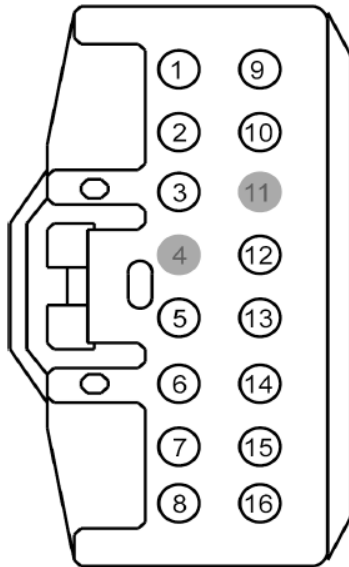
A/C Evaporative Thermistor Connector End View (C2295)
